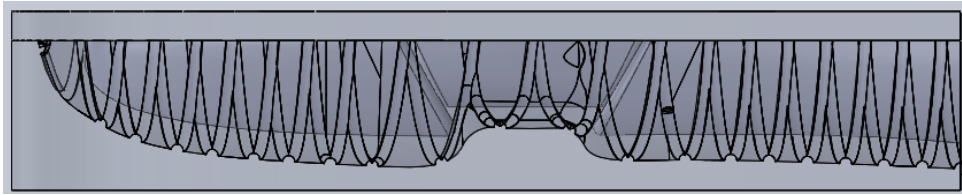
Bottom thumb mold pieces - the outer piece is transparent and the inner piece is solid
